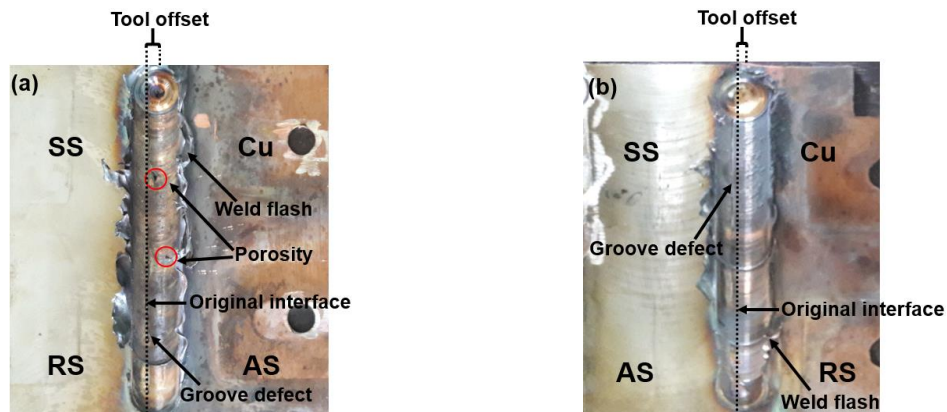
Manufactured FSW (Cu-SS) joints using different process parameters: (a) Without pre-heating the Cu and also Cu and SS were on the AS and RS respectively; (b) Without pre-heating the Cu and also Cu and SS were on the RS and AS respectively
